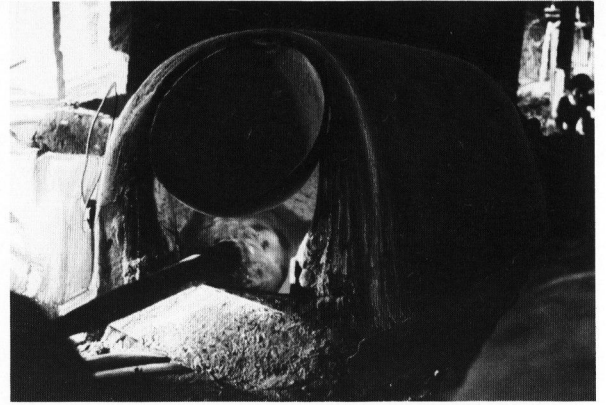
Mouth of the furnace for drawing glass tubes. The glass cone on the "ladha" can be seen below the potsherd, Papanaidupet.
